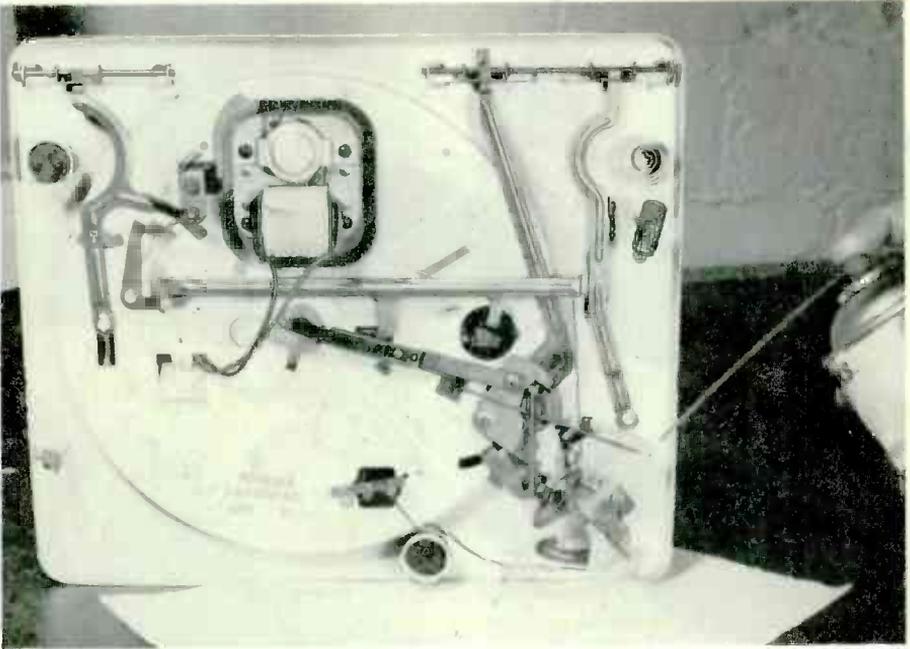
With most of the dirt removed, spray the moving parts with a tuner cleaner and lubricant to remove any deep-down dirt and lint. This will also remove caked grease if done properly.
